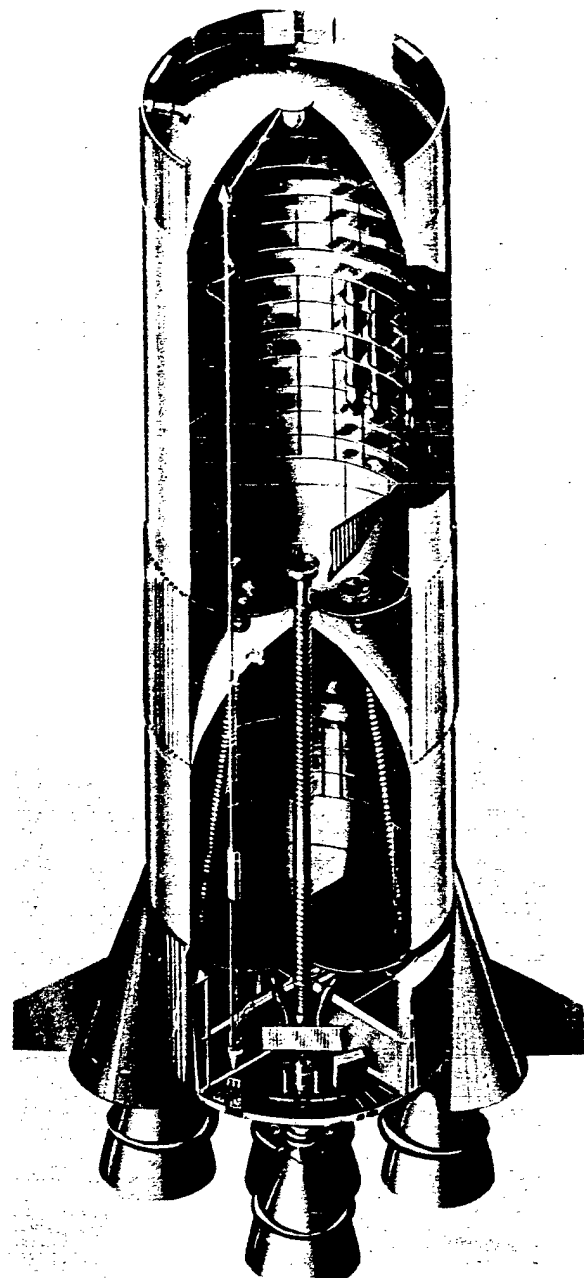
CUTAWAY VIEW OF LOX-TUNNEL WELD
